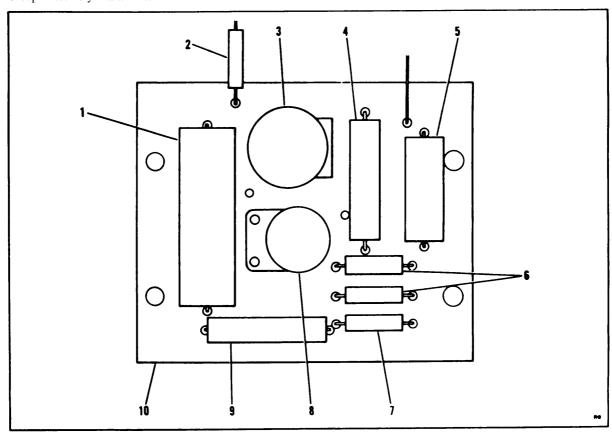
Printed Circuit Board Assembly, Part No. 400D-65C
